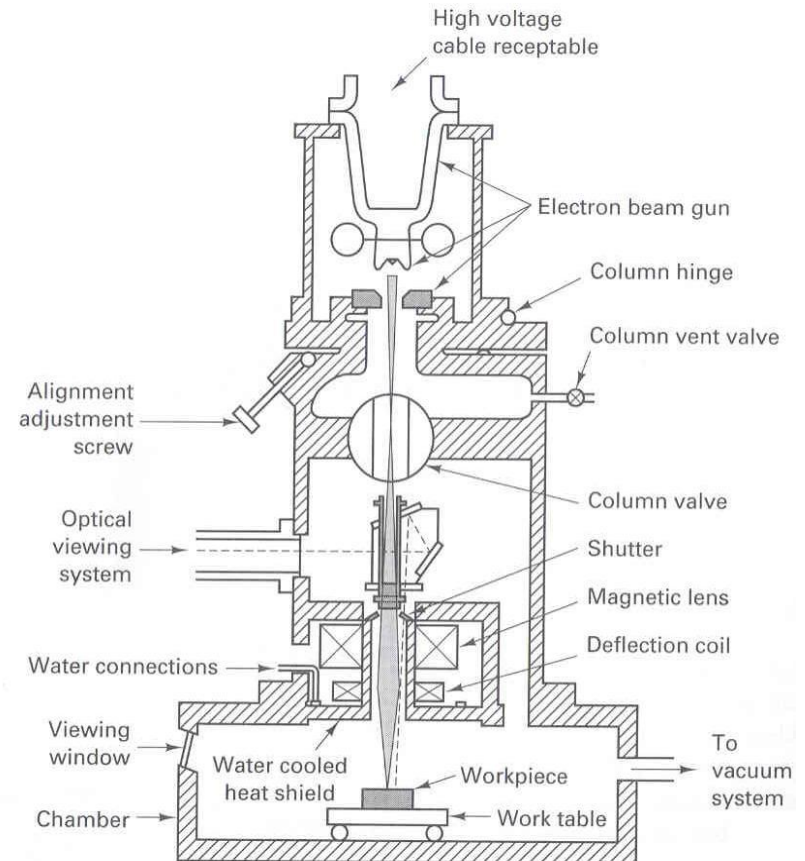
Schematic diagram of the electron beam welding process. (Courtesy of American Machinist.)
